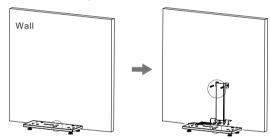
assemble the inverter mounting panel on the base Step 6 Hang the inverter onto the inverter mounting panel as Step 4
